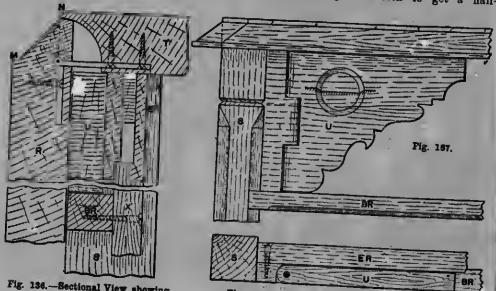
Sectional View showing Hingeing of Sideboard Flap.
